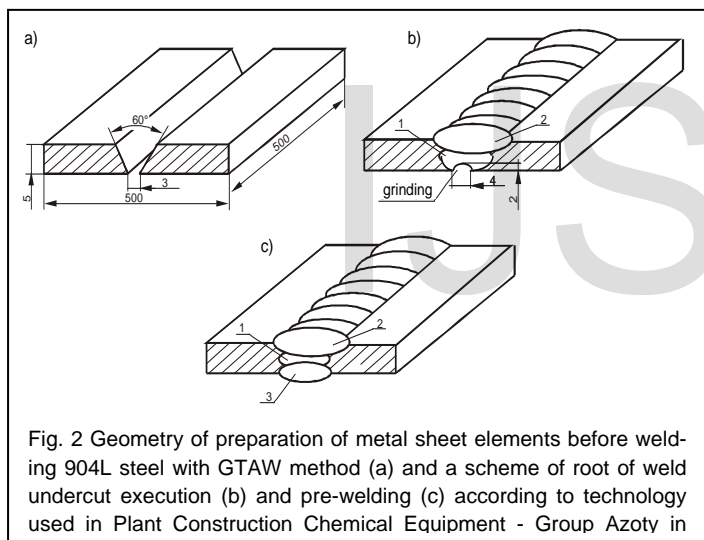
Geometry of preparation of metal sheet elements before welding 904L steel with GTAW method (a) and a scheme of root of weld undercut execution (b) and pre-welding (c) according to technology used in Plant Construction Chemical Equipment - Group Azoty in Tarnow.
